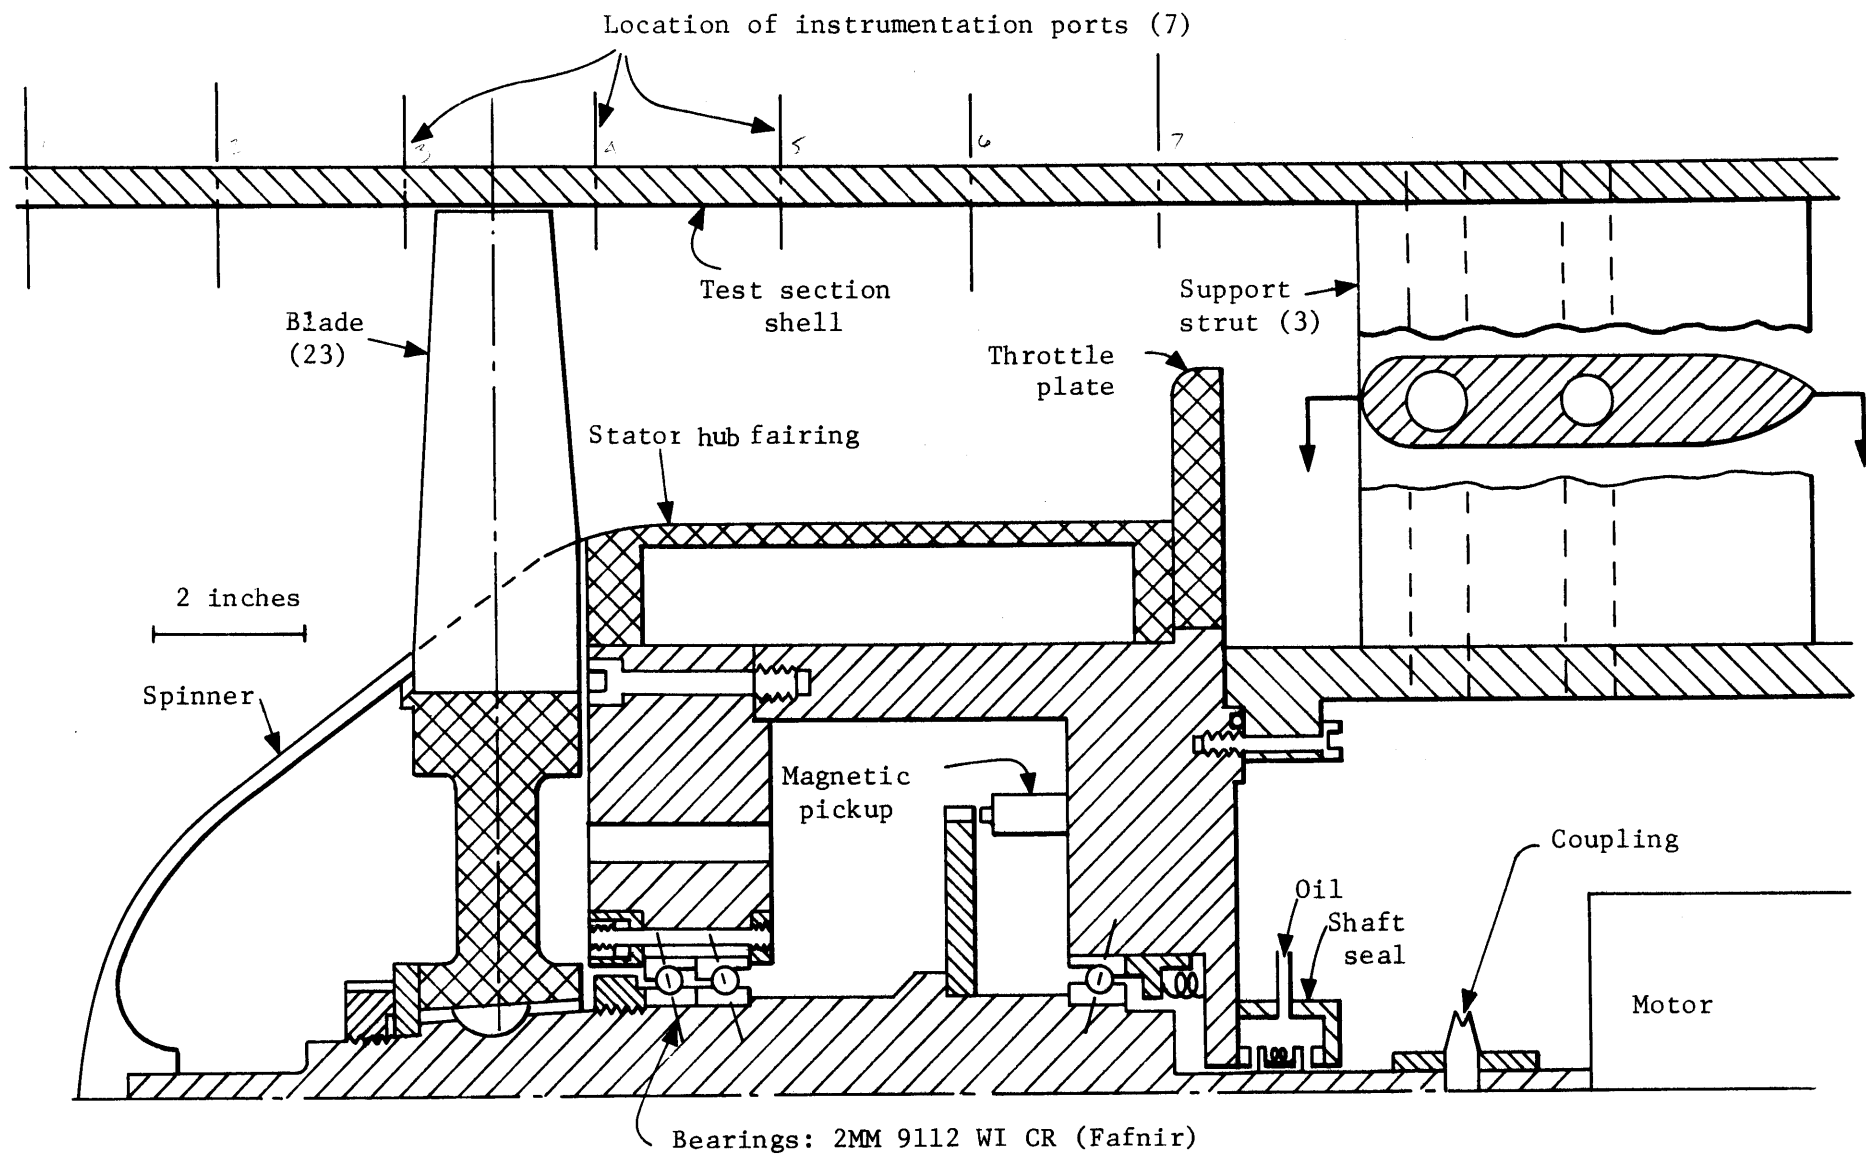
Scale drawing of the rotating assembly and test section, showing locations of rotor instrumentation ports, and throttle plate.
